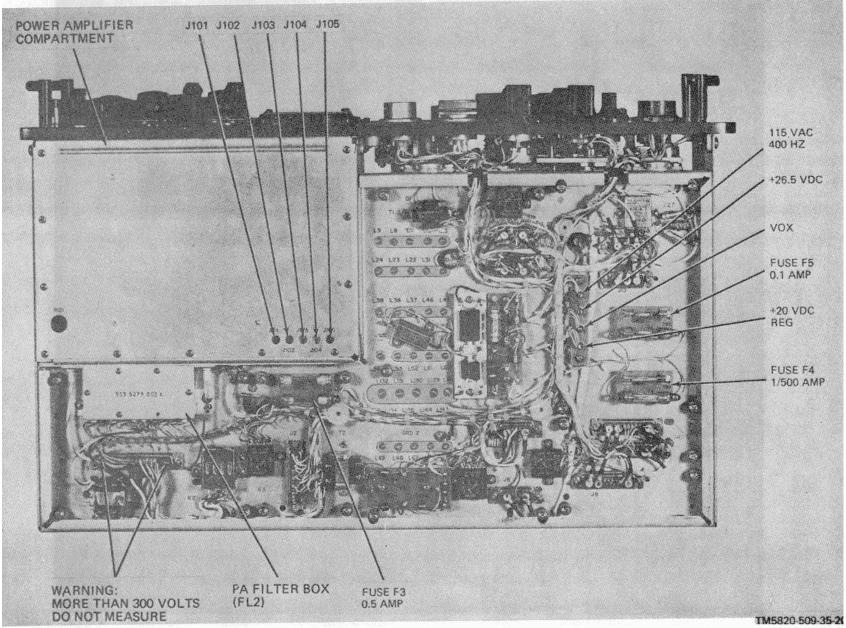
Radio Receiver-Transmitter RT-671/PRC-47 (A8), Bottom View, Location of Assemblies and Test Points.
